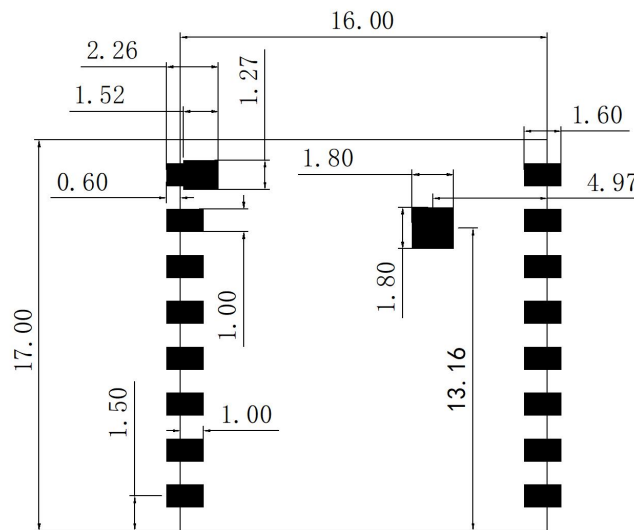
Recommended PCB Footprint Dimensions (Unit: mm)
